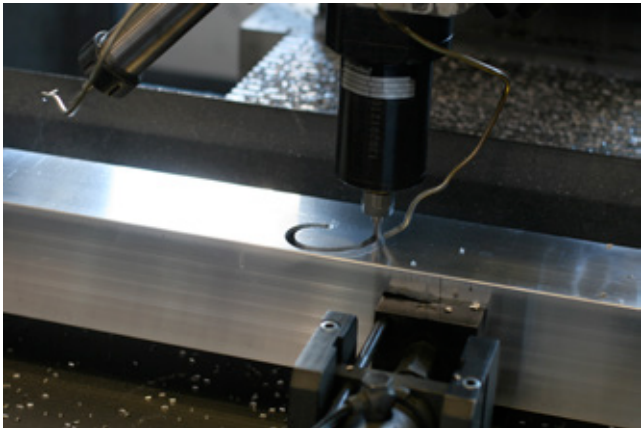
Machining a circular port in a square extruded aluminium section during the fabrication of Vague Formation
